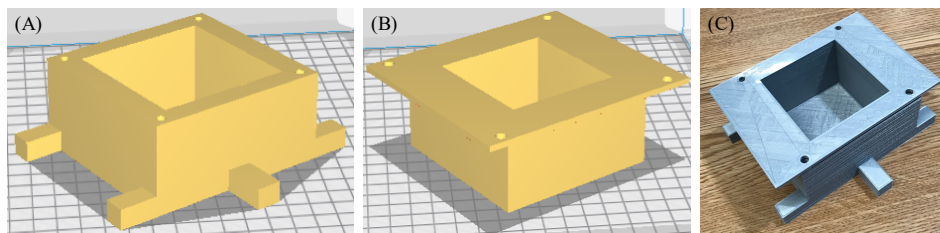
3D printed mold (A) design of the base, (B) design of the cover and (C) assemblage of the mold
